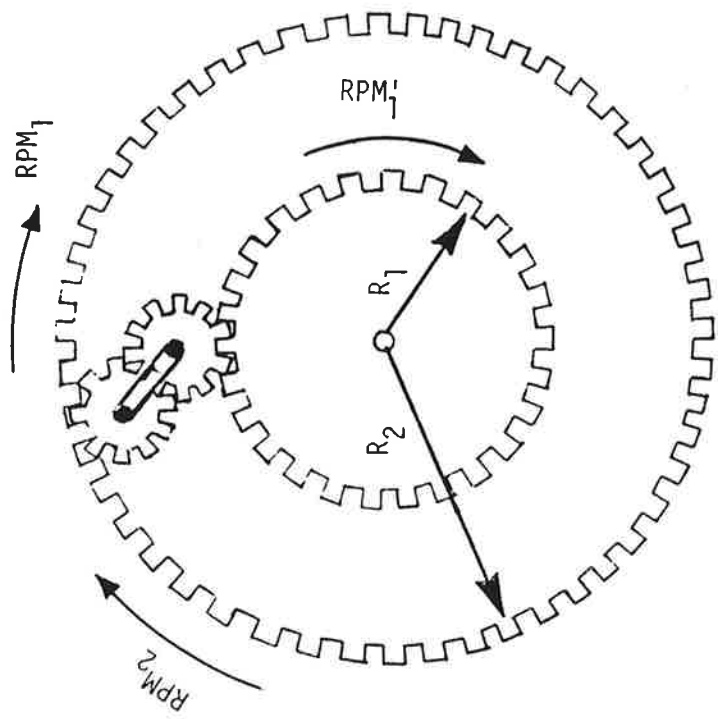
KINEMATIC SCHEME OF THE SPLIT TORQUE PLANETARY MECHANISM
